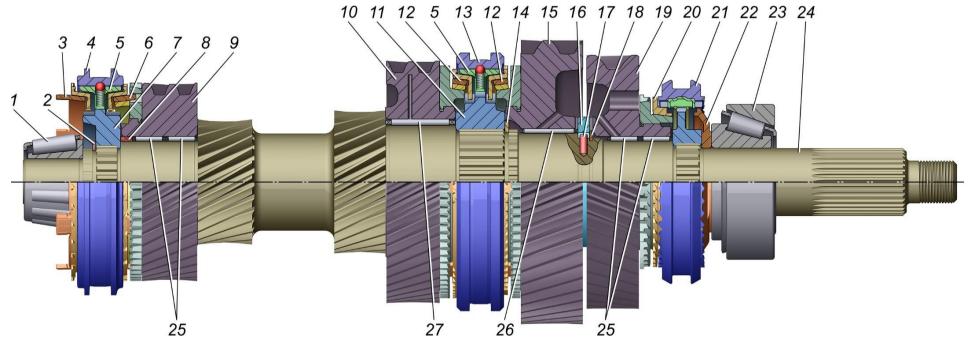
Secondary shaft assembly: 1 – roller taper bearing without outer race; 2, 14, 18 – locking rings; 3 – set of 4th speed gear synchronizer locking rings; 4 – 3rd and 4th speed gears synchronizing sleeve; 5 – synchronizer T-block; 6 – set of 3rd speed gear synchronizer locking rings; 7 – 3rd and 4th speed gears synchronizer hub; 8 – spacer ring; 9 – 3rd speed gear; 10 – 2nd speed gear; 11 – 1st and 2nd speed gears synchronizer hub; 12 – sets of 1st and 2nd speed gear synchronizer locking rings; 13 – 1st and 2nd speed gears synchronizing sleeve; 15 – 1st speed gear; 16, 22 – thrust washers; 17 – pin; 19 – reverse gear; 20 – reverse synchronizer locking ring; 21 – reverse synchronizer; 23 – taper roller bearing; 24 – secondary shaft; 25, 26, 27 – needle roller bearings without rings.
